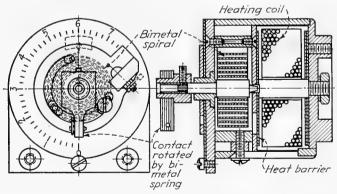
In this Westinghouse overload relay for large motors, a portion of the motor current is passed through a heating coil within the relay. Heat from the coil raises the temperature of a bimetal spiral which rotates a shaft carrying an electrical contact. To withstand the operating temperature, a heat-resistant bimetal is used, coiled into the spiral form for compactness. Because of the large deflection needed, the spiral is long and thin, whereas the width is made large to provide the required contact pressure.
